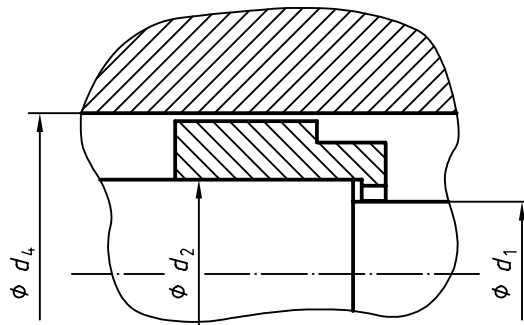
Step-balanced mechanical seal with or without a short sleeve
